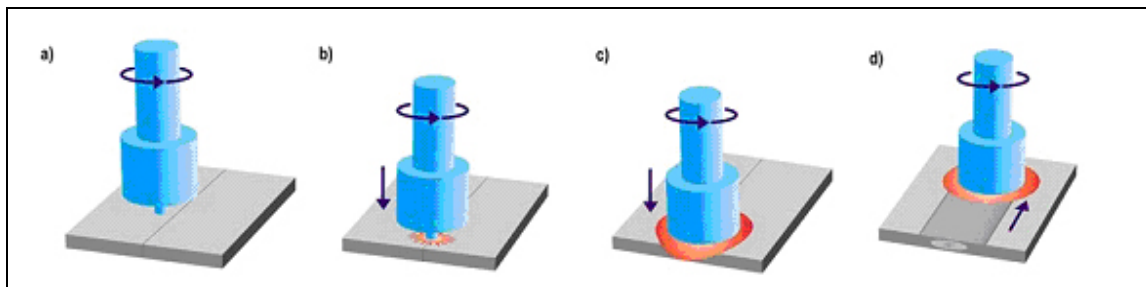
Basic movement of the Friction Stir Welding tool in relation to the workpiece.
